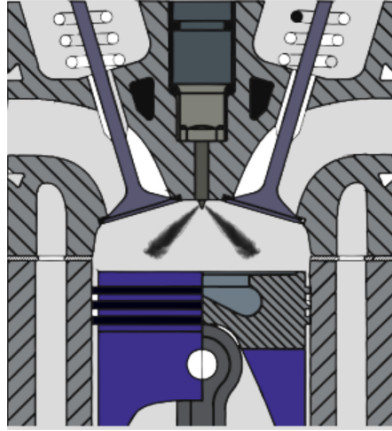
Drawing of a cut-section of an engine block and cylinder in a direct injection Diesel engine. From [3]
